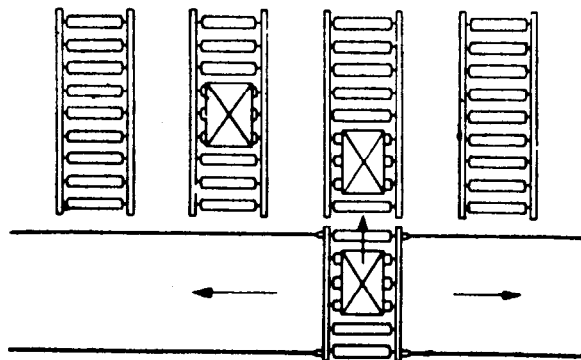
TRANSFER ROLLER CONVEYOR, STRAIGHT THROUGH TYPE
